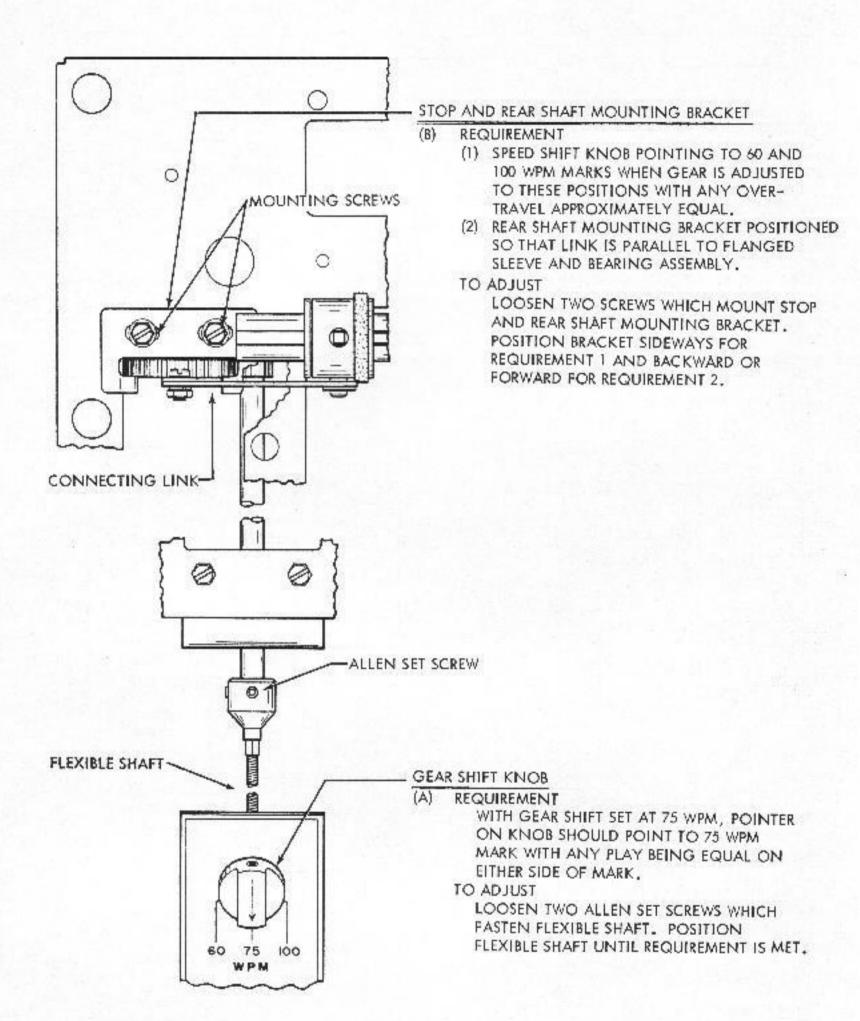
STOP BRACKET AND REAR SHAFT MOUNTING BRACKET FOR MODEL 28 TAPE PRINTER KEYBOARD
